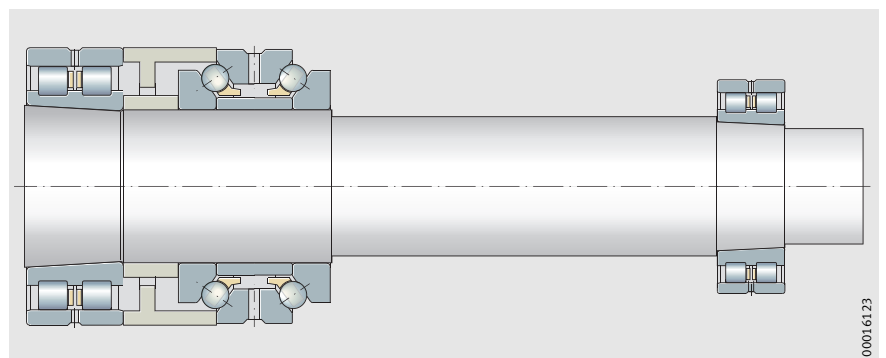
· Bearing arrangement with double direction axial angular contact ball bearings
